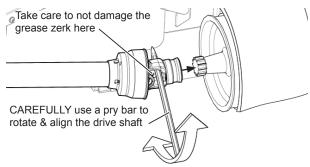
Connect Drive Shafts (both sides of feeder house)
